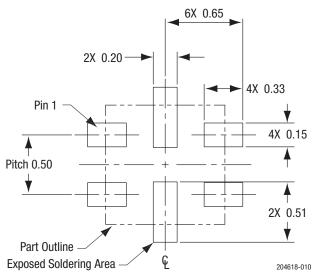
SKYA21024 PCB Layout Footprint (Top View)
